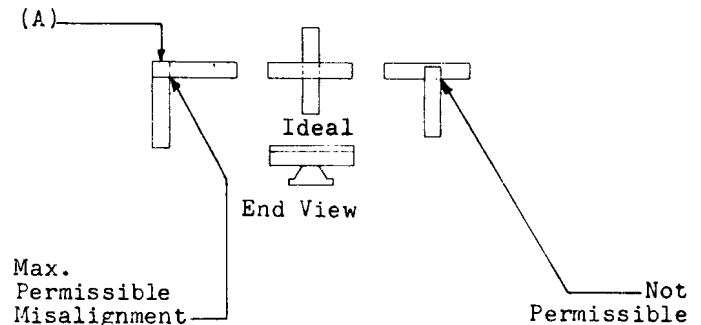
Alignment of Standard Contacts - Plan View of Contact Surfaces
